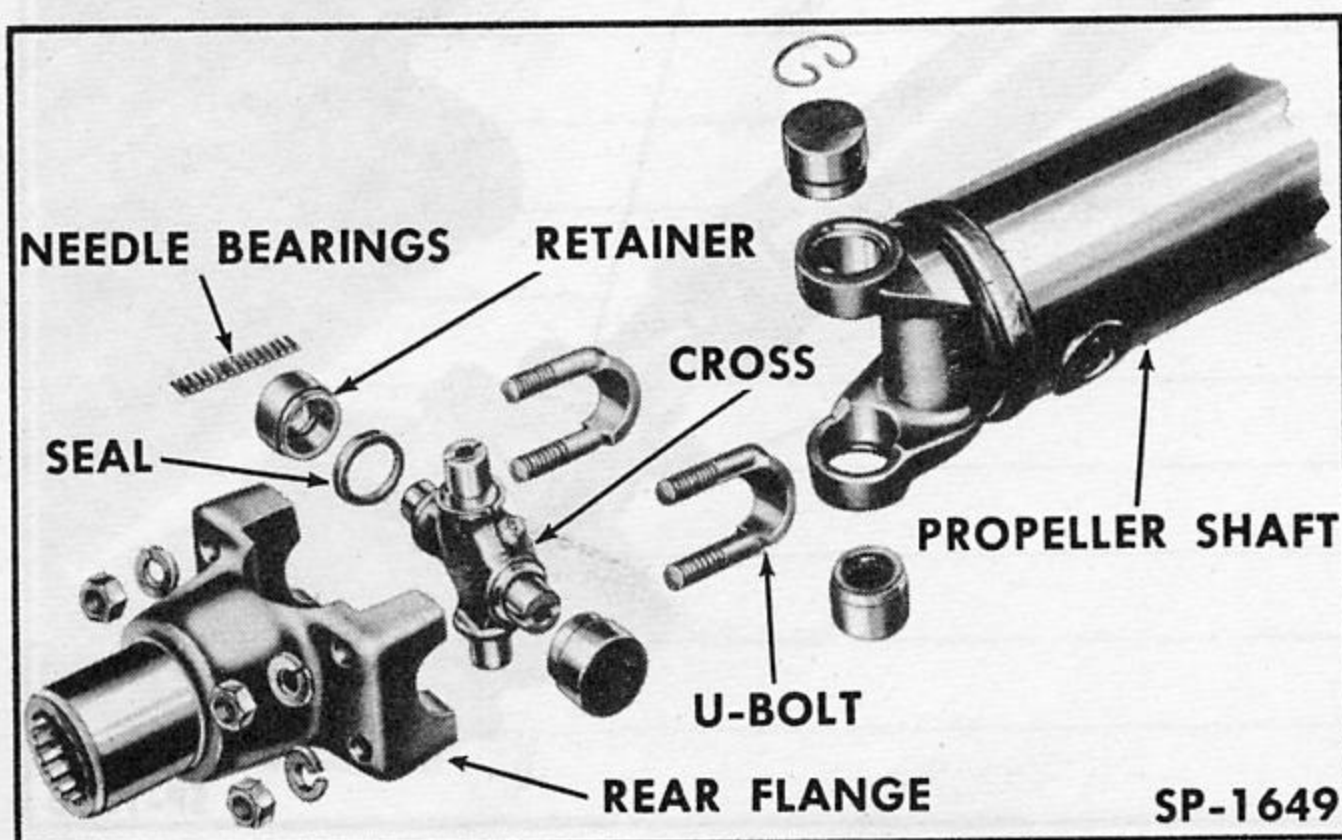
Cross and Yoke Universal Joint—Exploded View
